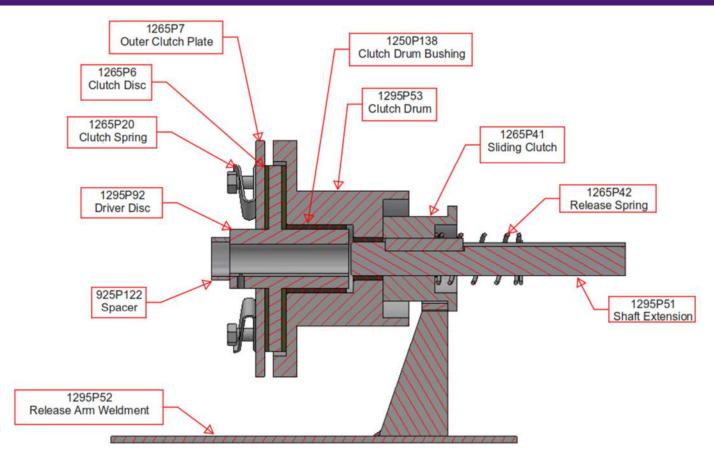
Illustration of Parts: Sectional Detail View of Clutch Assembly
